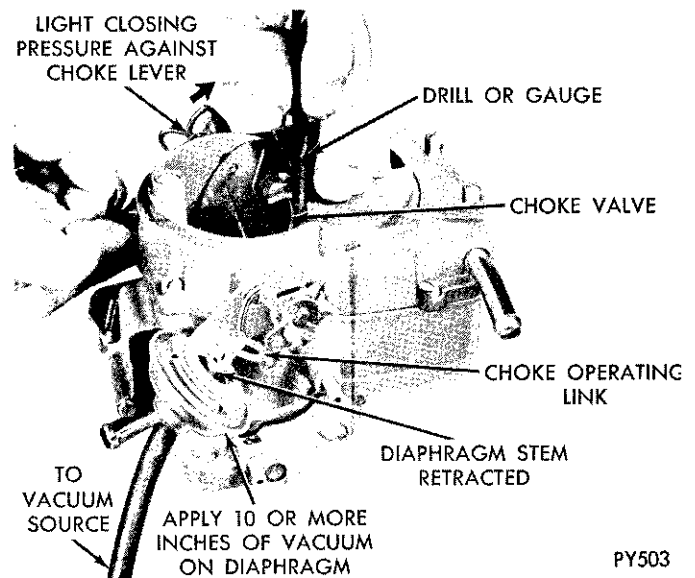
Checking Choke Vacuum Kick Setting (Wide Open Kick)
